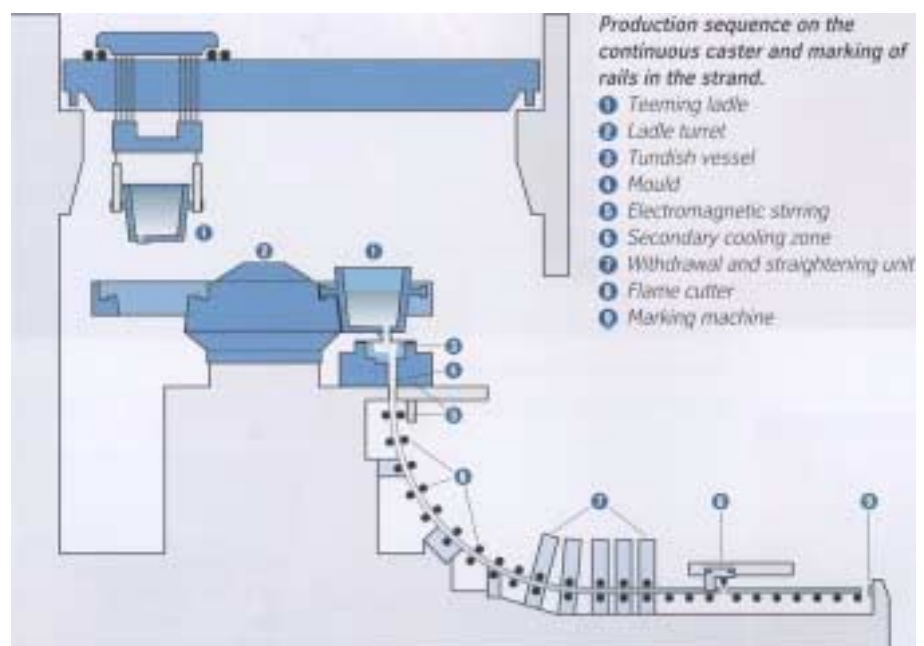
Principle of a Continuous Casting machine (Thyssen)
